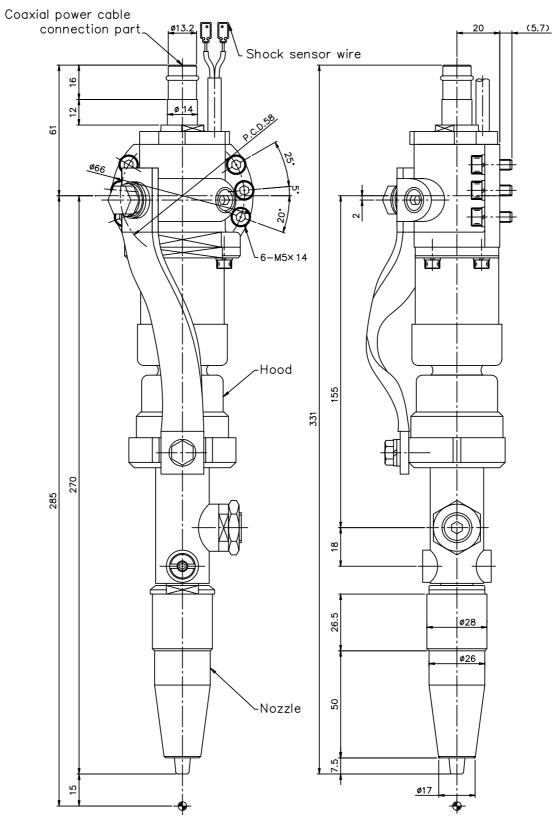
Outline drawing of forced pressure power feeding torch equipped with shock sensor [MTZ-3502]
